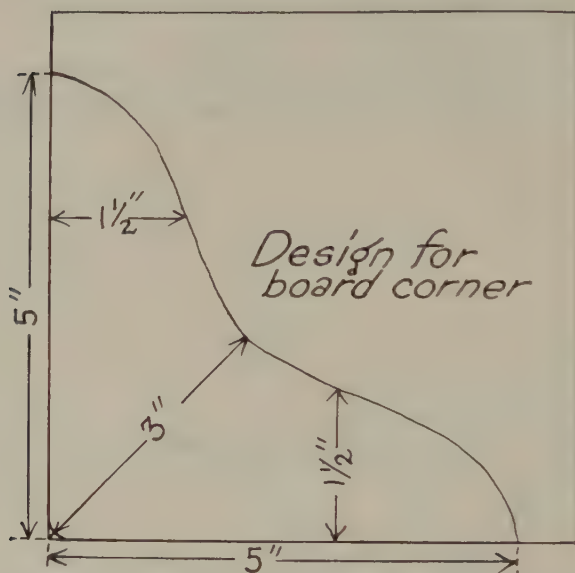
PLAN OF DESIGNING BOARD CORNERS
